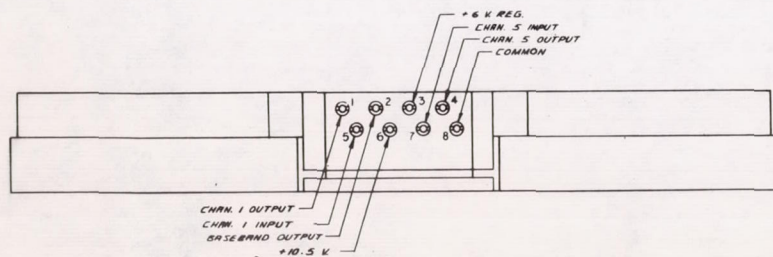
SUBCARRIER OSCILLATOR DECK "B" ASSEMBLY
